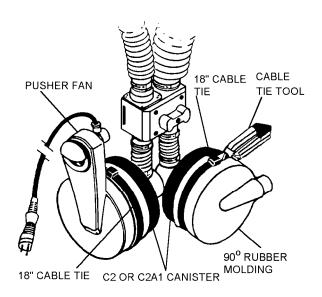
Applying Cable Ties to Pusher Fan and 90° Rubber Molding
